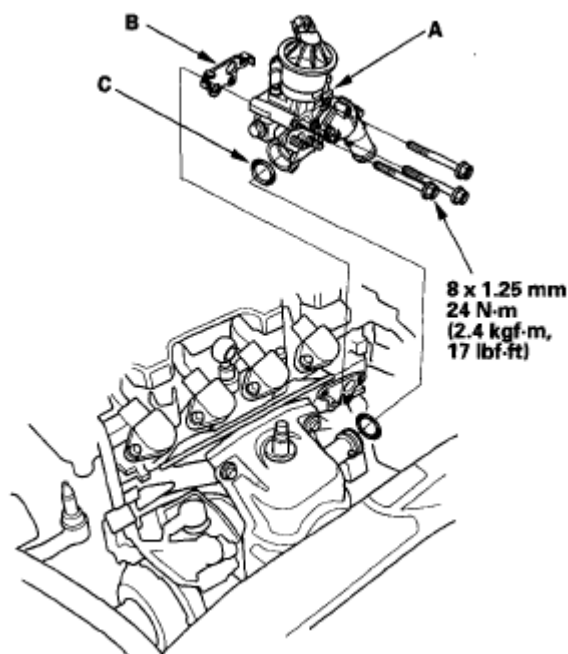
Identifying Thermostat Housing, Gasket And O-Ring With Tightening Torque
